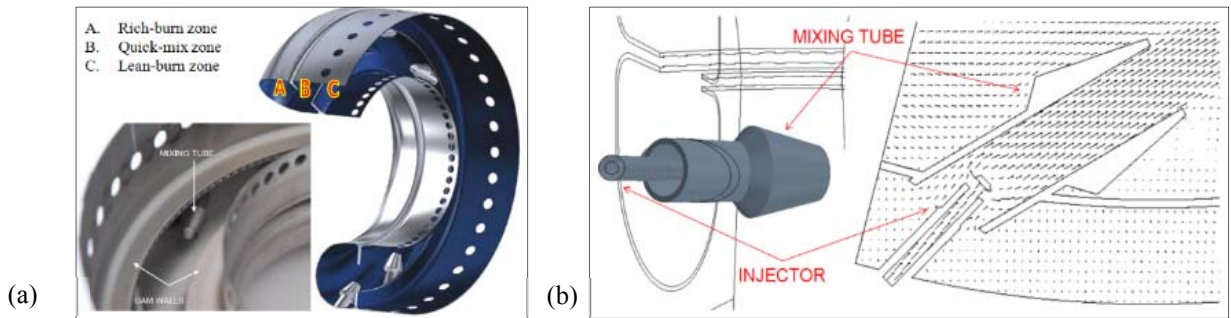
(a) Annular RQL CC of Elliott TA 80 R; (b) Injector and Mixing Tube.
